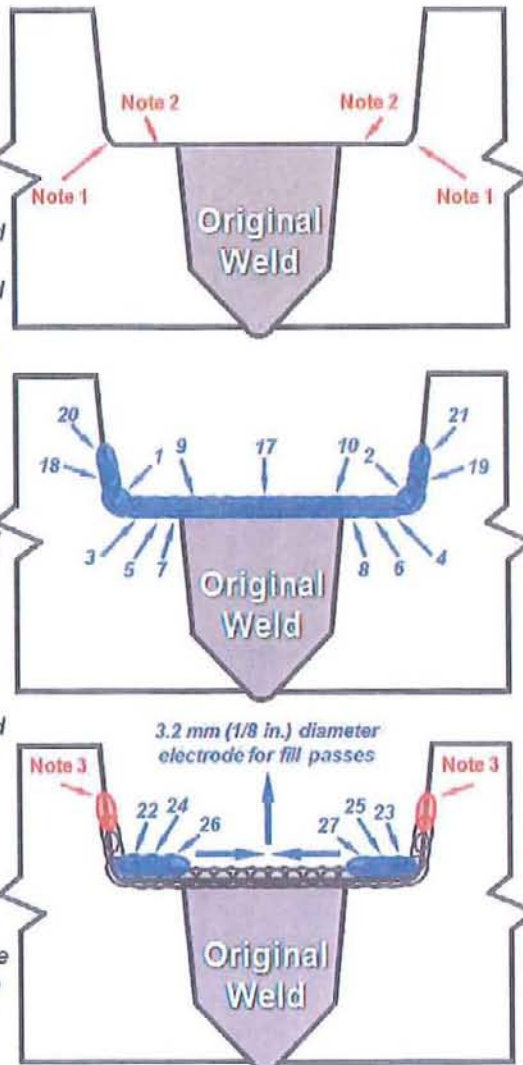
Schematic of the Controlled Fill Welding Procedure for Grade 91 Steel for a Partial Weld Repair of a Circumferential Girth Weld.
